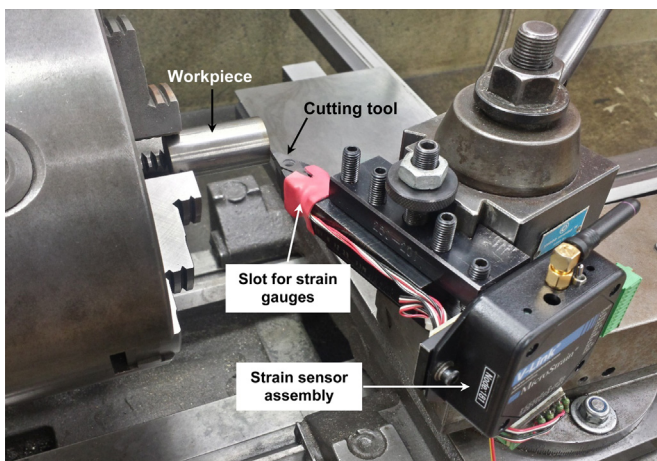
Experimental setup for orthogonal machining showing the position of the cutting tool and the strain sensor assembly used for measuring the cutting forces.
